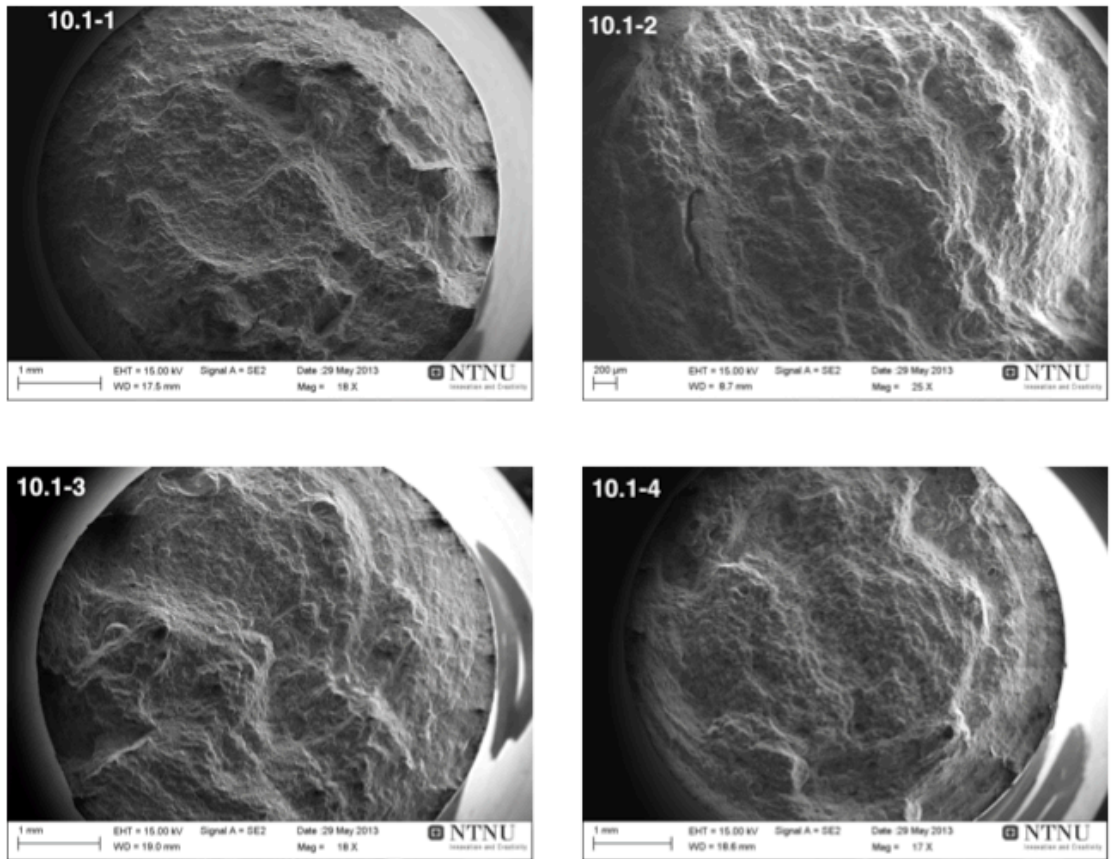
Fractographs of the Al-10wt% AZ31-1 tensile test parallel.
